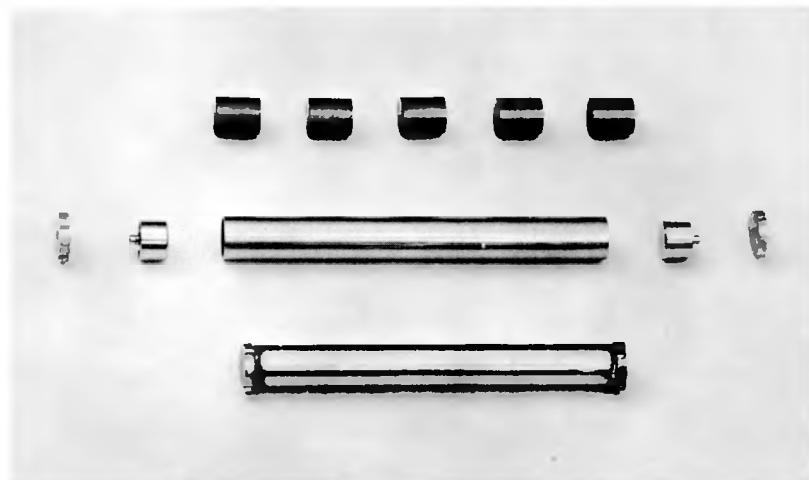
UO₂ Pellets, Specimen Tube Components Including End Plugs and Spacers
